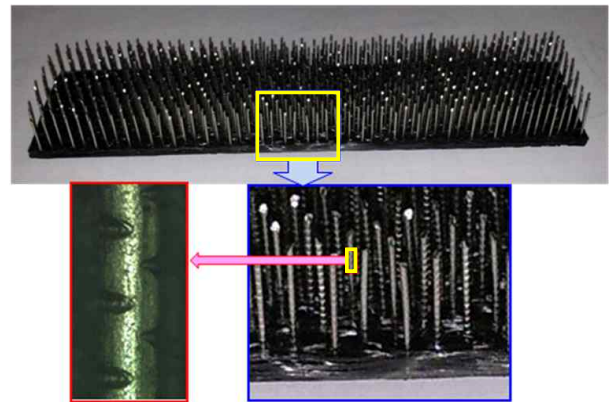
Z-pinning patch manufactured using stainless pin machined into jagged shapes
